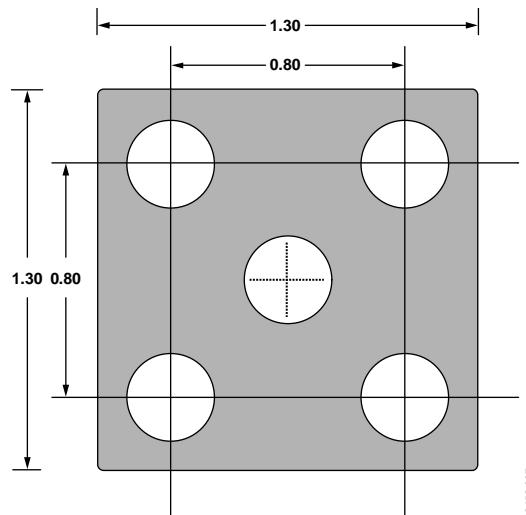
Recommended PCB Thermal Attach Pad Dimensions (mm)
